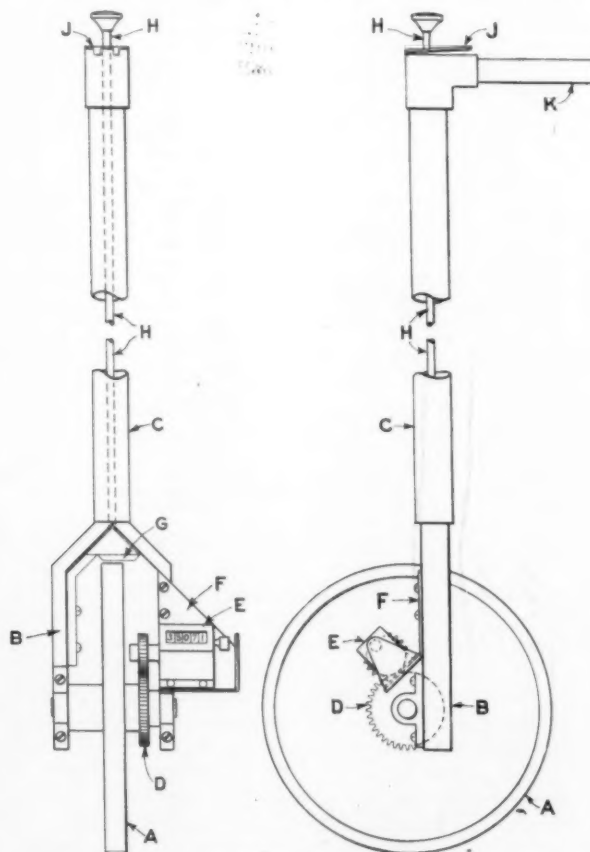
DRAWING SHOWING DETAILS OF APPARATUS
